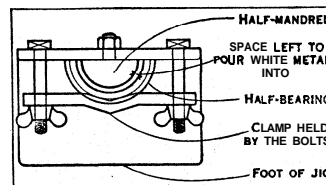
METALLURGY JIG FOR HOLDING A HALF-BEARING AND HALF-MANDEL OR CORE
